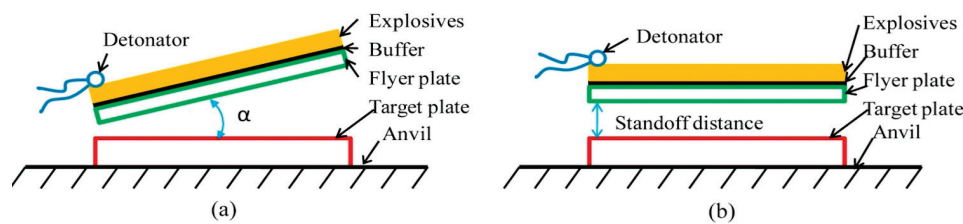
Sketch of the experimental setups for explosive welding: (a) inclined; (b) parallel. Reproduced from [23].
